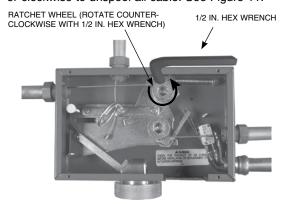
SPRING PLATE RATCHET WHEEL ROTATION
